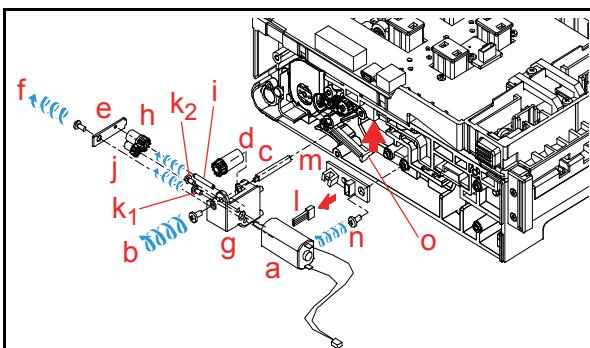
Transport Motor/Transport Encoder Sensor Board/Centering Motor Removal
